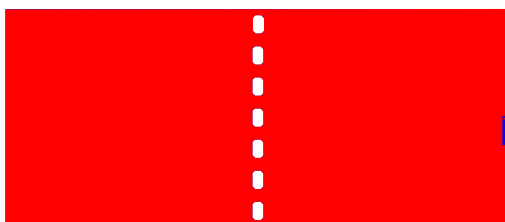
Layout of the boards for mechanical testing with 50 % perforation holes-based approach.
